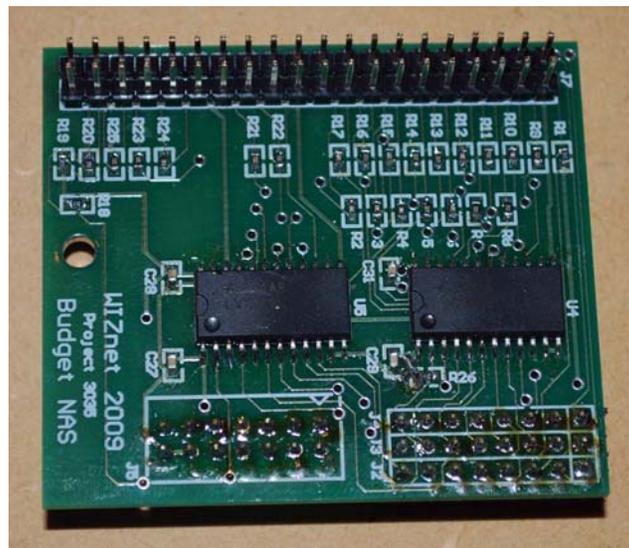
Level Translating Latch PCB with IDE 40-way connector
